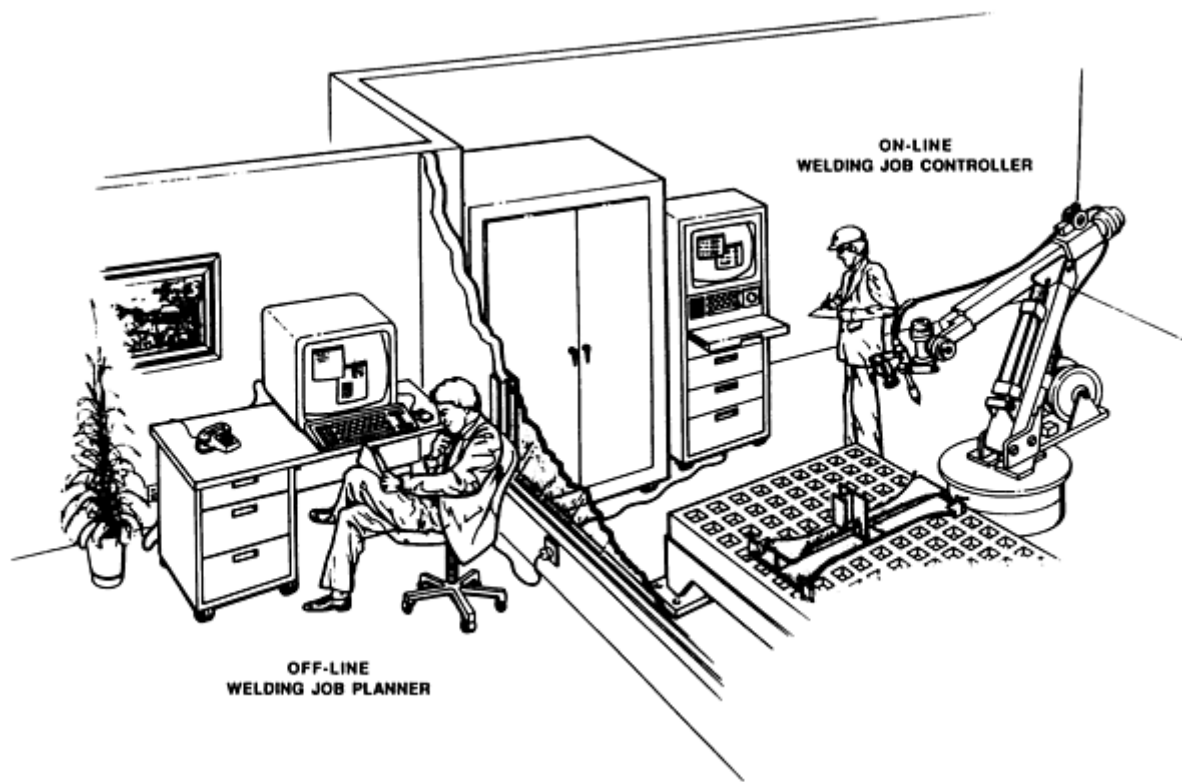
INTELLIGENT AUTOMATED WELDING SYSTEM
